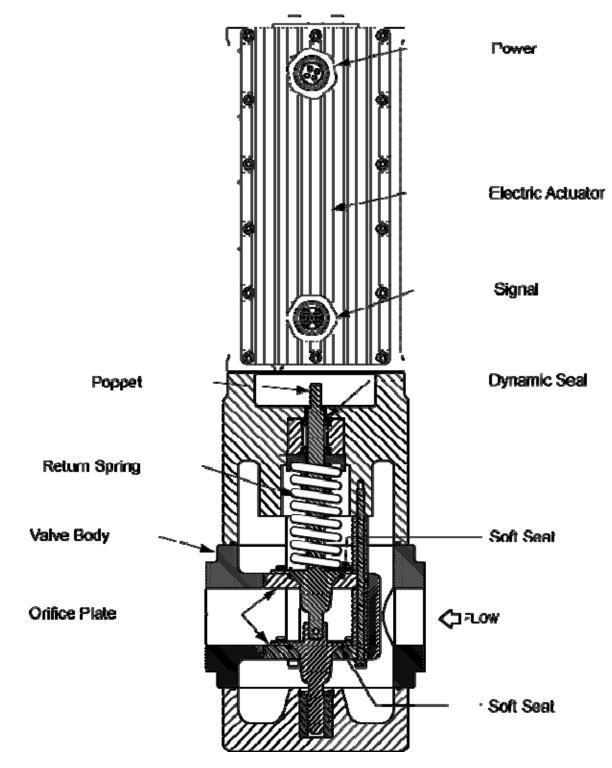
HFG2.0 Cut-Away View (Partial)
